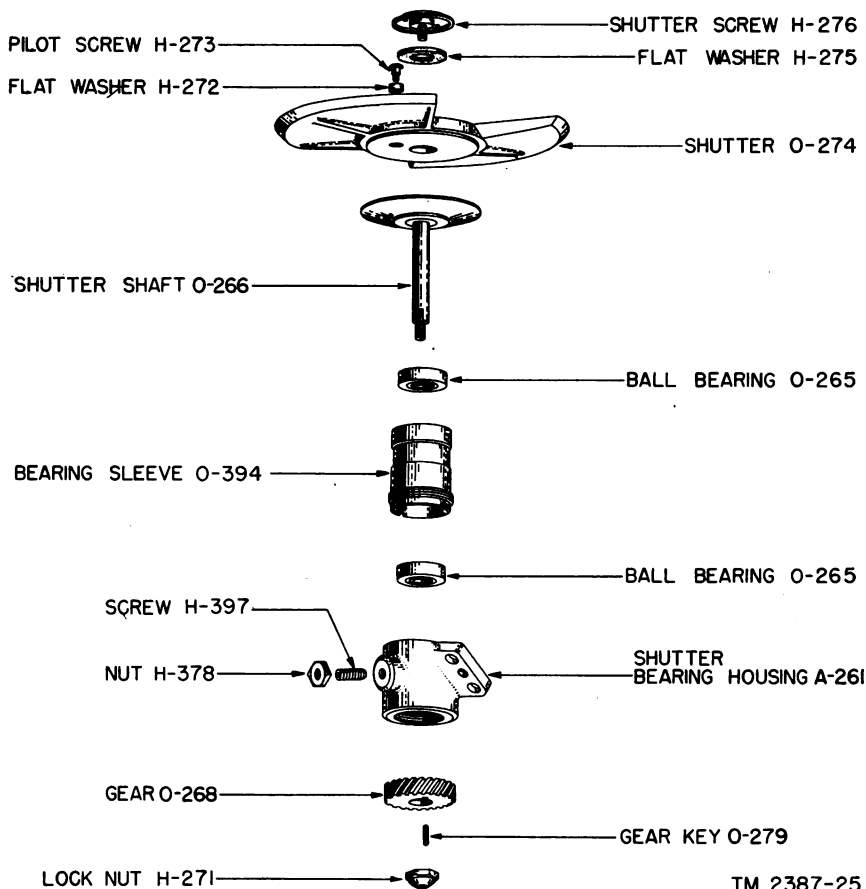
Shutter and shutter bearing housing assembly, exploded view.
